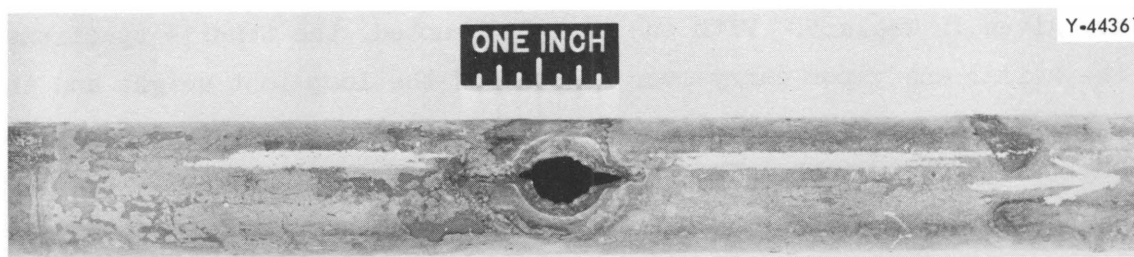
Failure in the Horizontal Vapor Carry-Over Line of Haynes Alloy No. 25 Boiling-Potassium Loop Test After 760 hr of Operation. Failure occurred in the weld fusion zone of the pipe.
